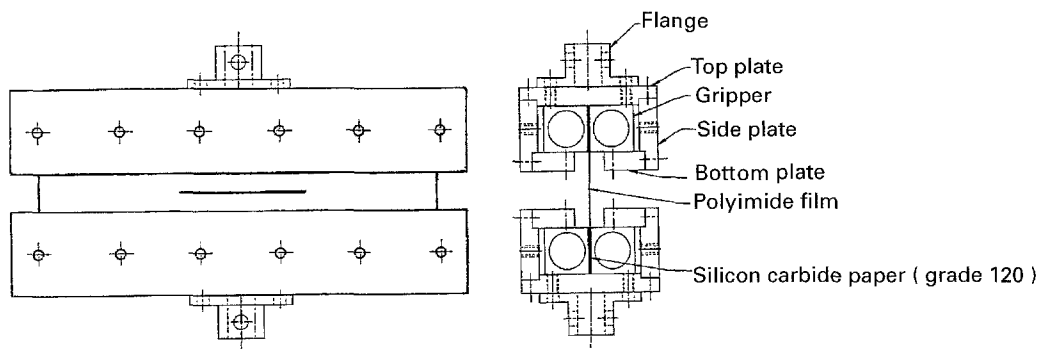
Details of the constrained short tension specimen used to test polyimide film.
